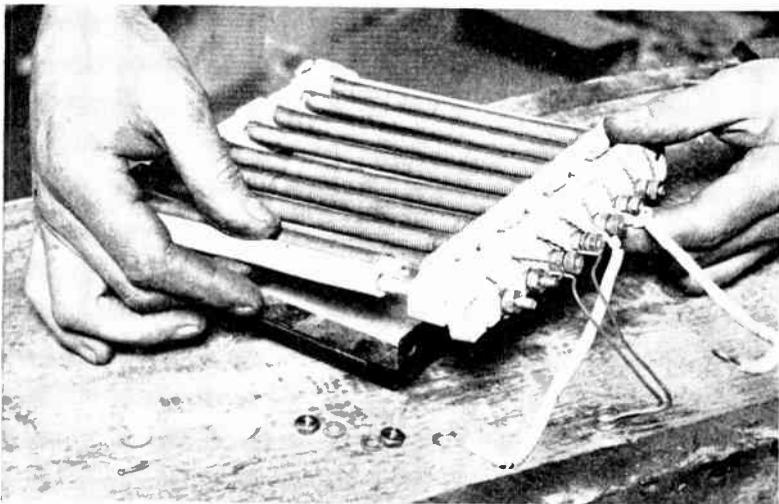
METHOD OF FITTING NEW ELEMENT SECTION TO 2-KILOWATT BOILING PLATE.
